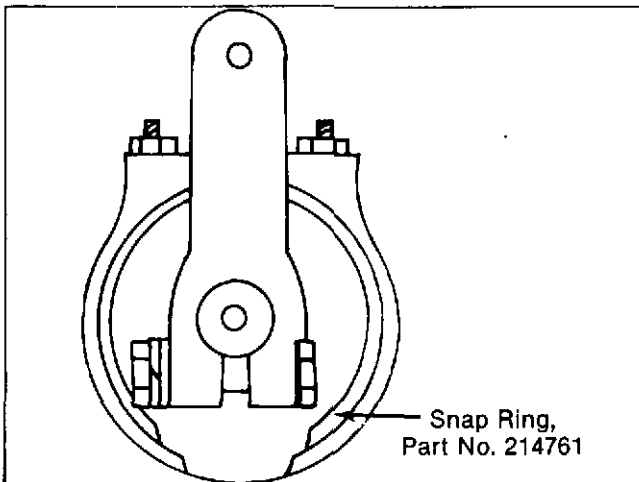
, (F5291). Throttle shaft retaining ring installed.
